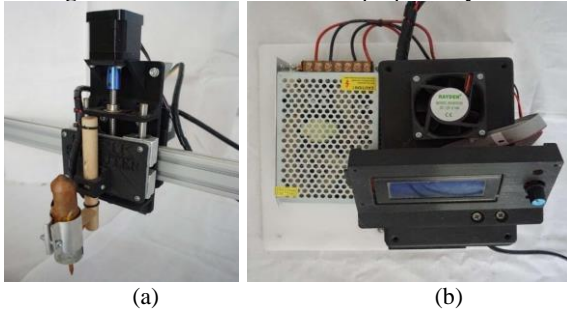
The closer views (a) V-wheel assembly, lead screw, and the electric canting. (b) Power supply, cooling fan, utility box, and LCD.
